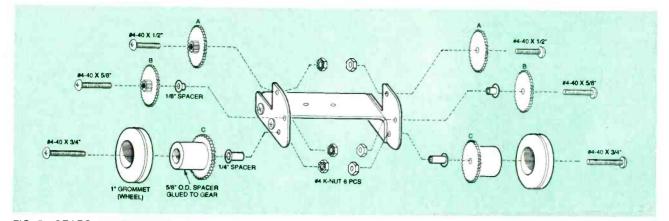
GEARS ARE MOUNTED with No. 4-40 machine screws and nuts. Threaded holes in the mounting bracket hold the gear screws, with nuts locking the screws in place.
